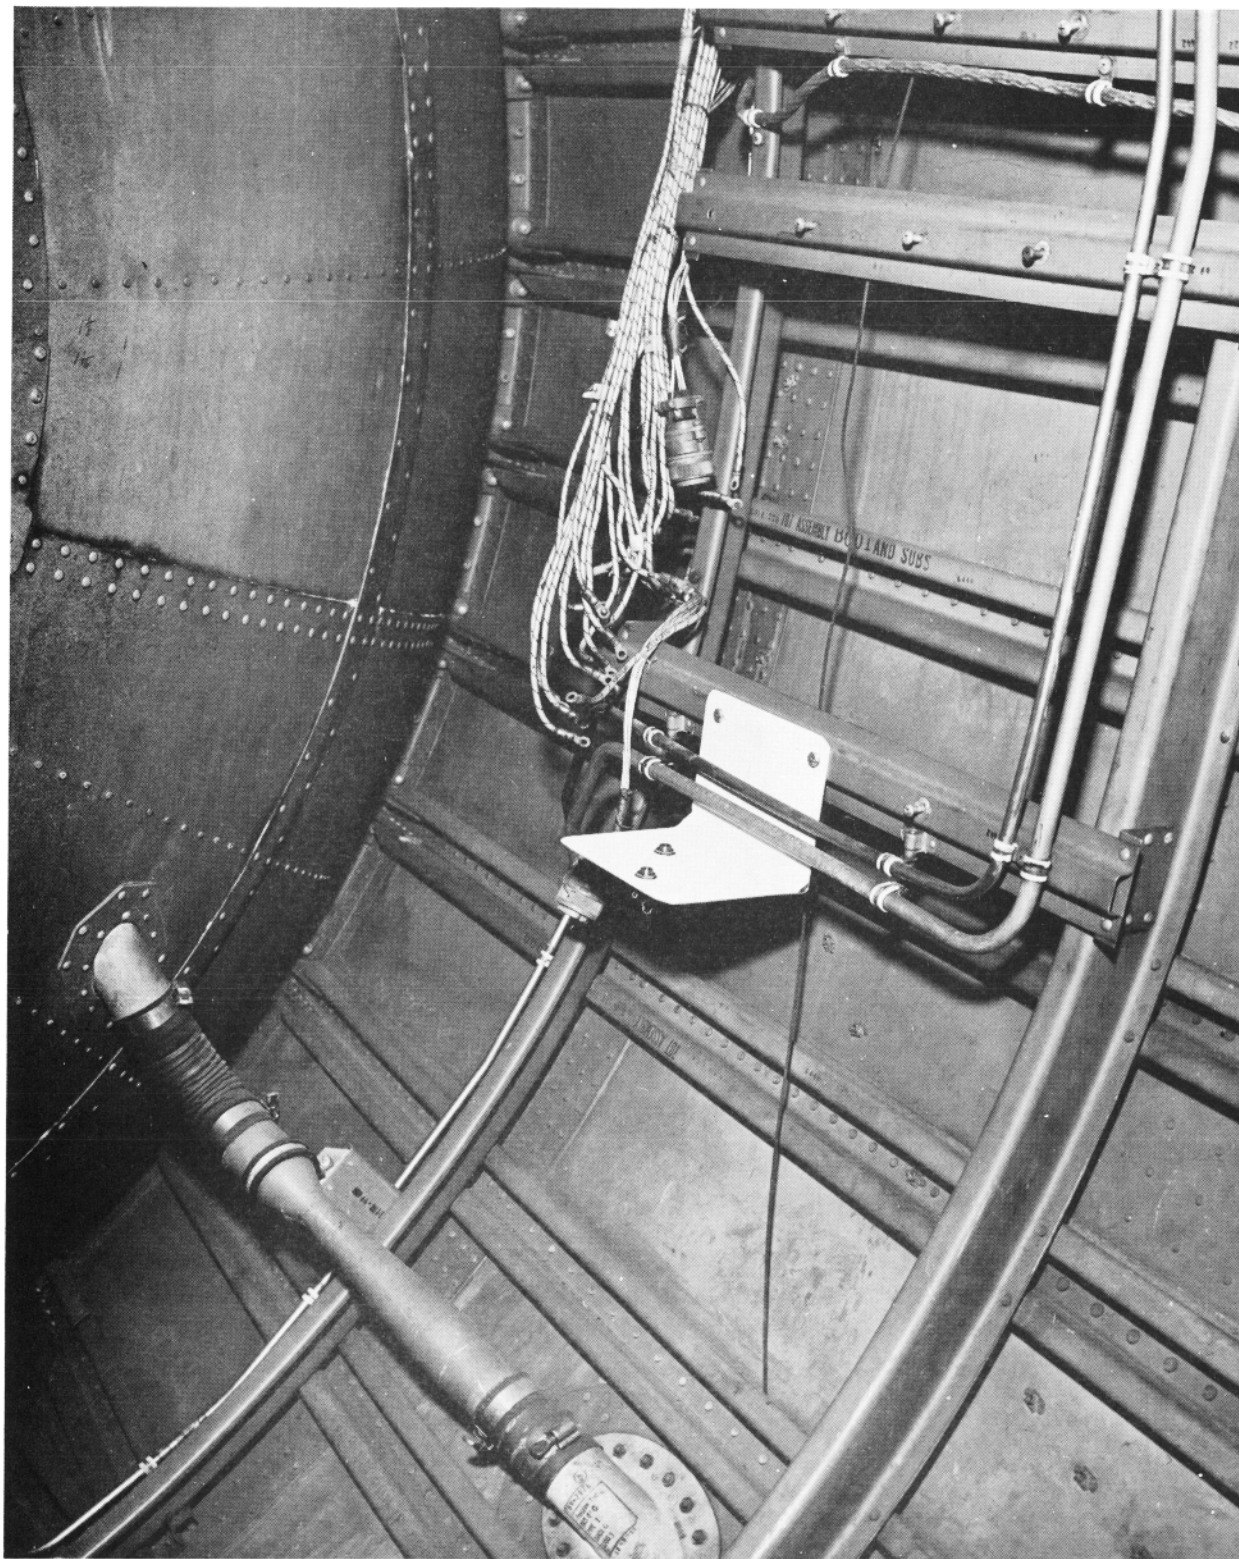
LOCATOR BEACON ATTACHMENT IN AFT POSITION
